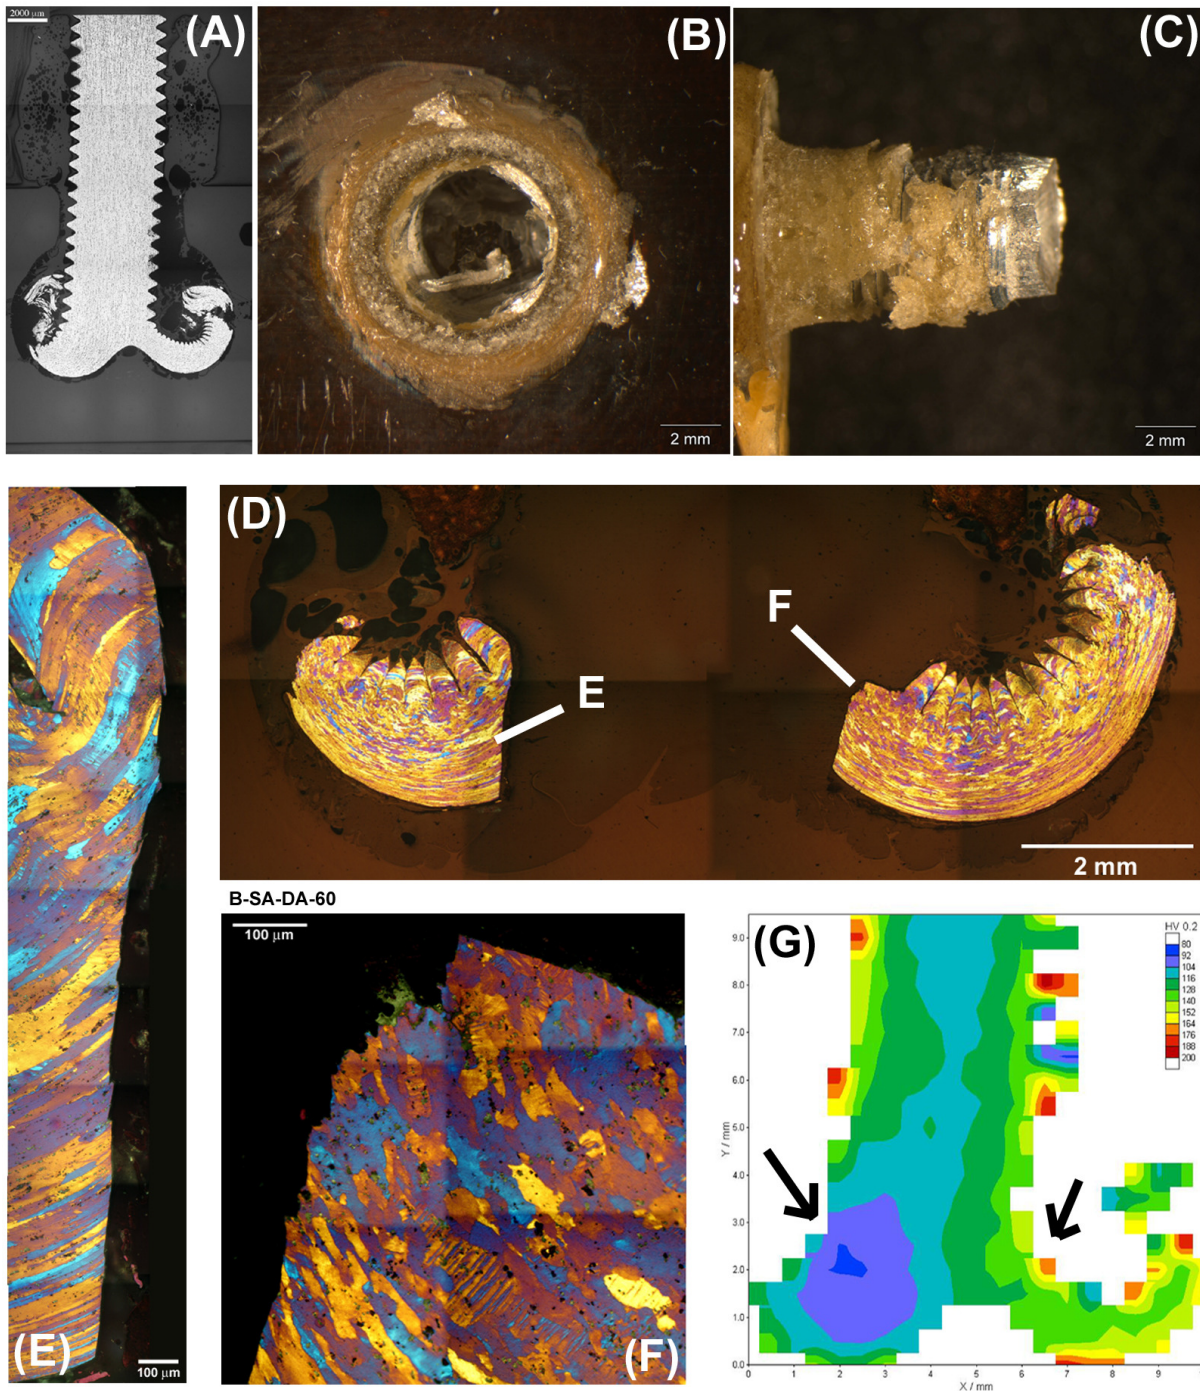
Example of a RI-fracture type (TT-sample 4,0 sec). A) Joint's cross section prior to testing, 16X. B) Top view of the fractured polymeric base plate, 18X. C) Appearance of the fractured rivet, 18X. D) Cross section overview of the fractured polymeric base plate, 50X, Barker. E) Magnified view of the region E in D), 500X, Barker. F) Magnified view of the region F in D), 500X, Barker. G) Microhardness map from cross section macrograph in A); the black arrows indicate the crack initiation site in the AZ.
